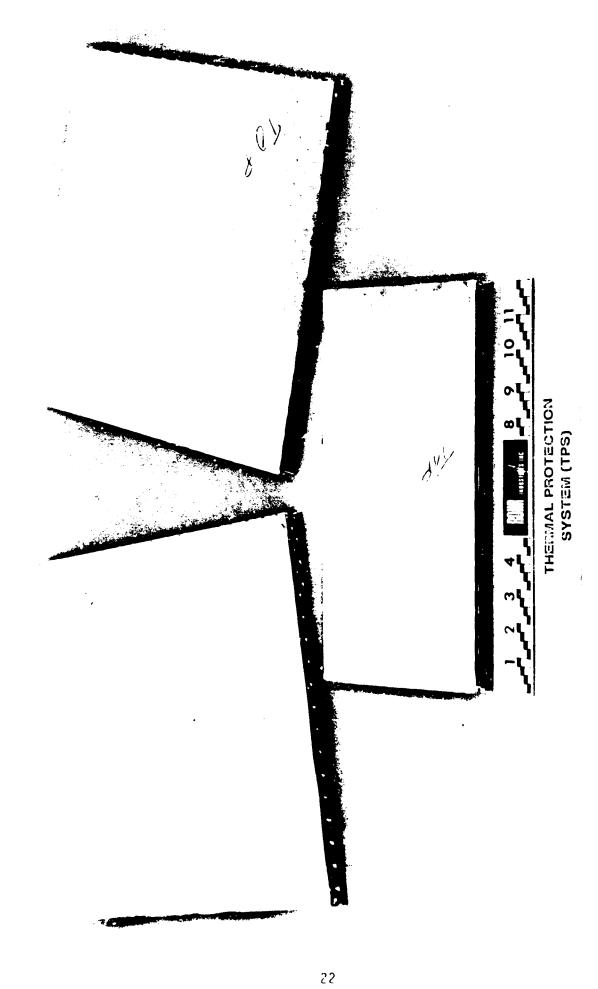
Multiwall Panels LID Bonded for Test Specimens
